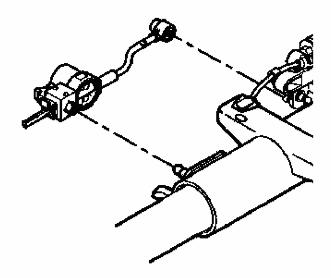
View Of Automatic Transmission Shift Lock Control Actuator Courtesy of GENERAL MOTORS CORP.
